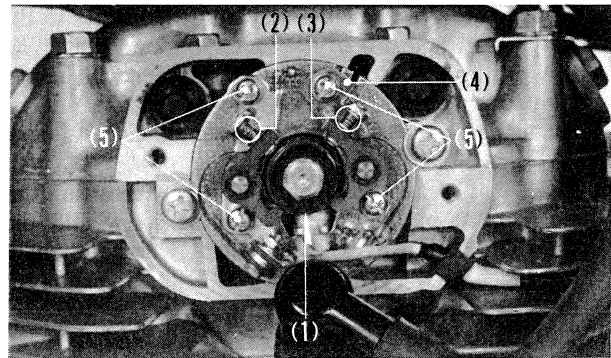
(1) Point cam (5) Contact breaker plate locking screw
